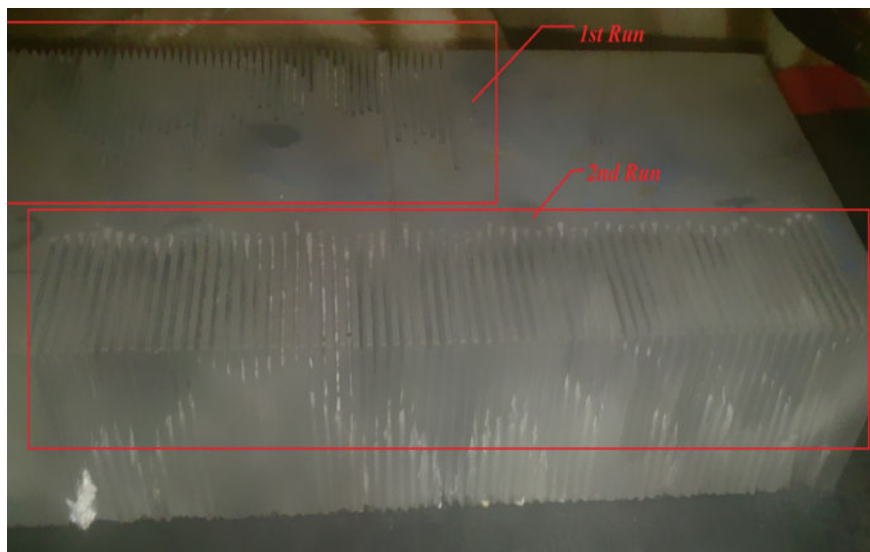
Controlled depth AWJ-milled Ti workpiece [7]
